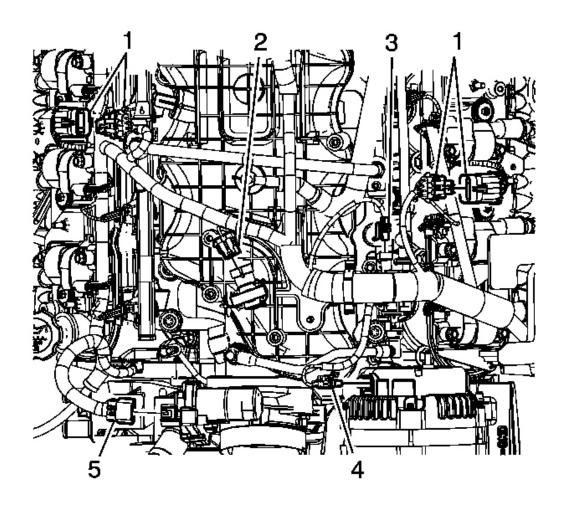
Locating EVAP Purge Solenoid, MAP Sensor & Main Coil Courtesy of GENERAL MOTORS CORP.
